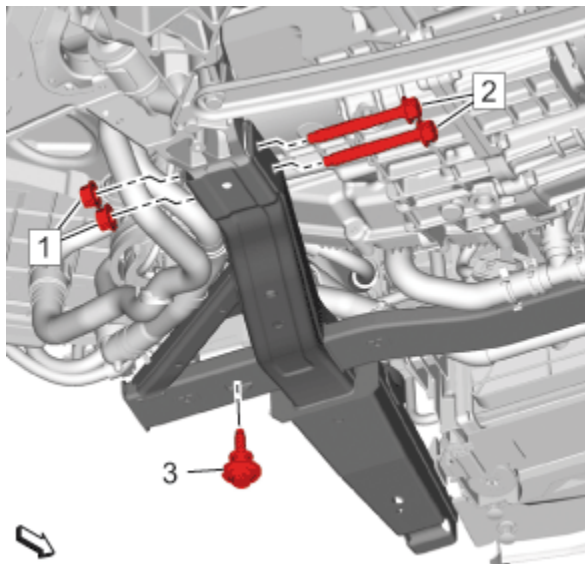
Drivetrain And Front Suspension Crossmember Extension Fasteners
